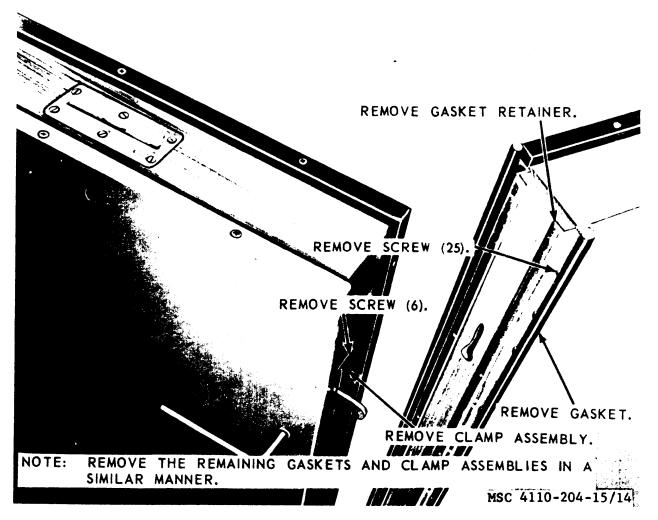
, Refrigerator panel and door seals, and clamp assemblies, removal and installation
